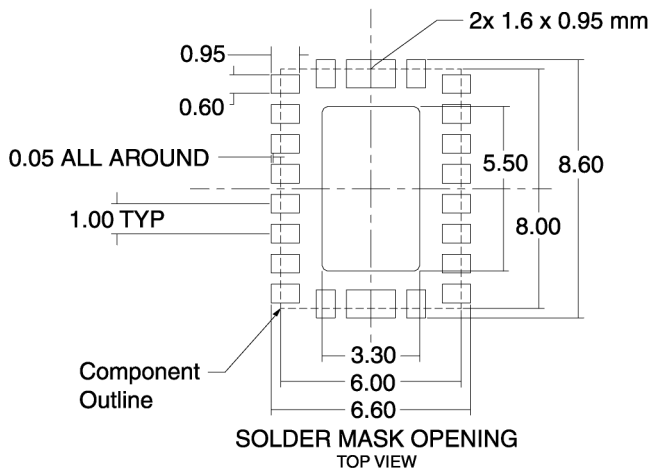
Phone Board Layout Footprint for 6 x 8 mm Package – SKY77324 Specific
